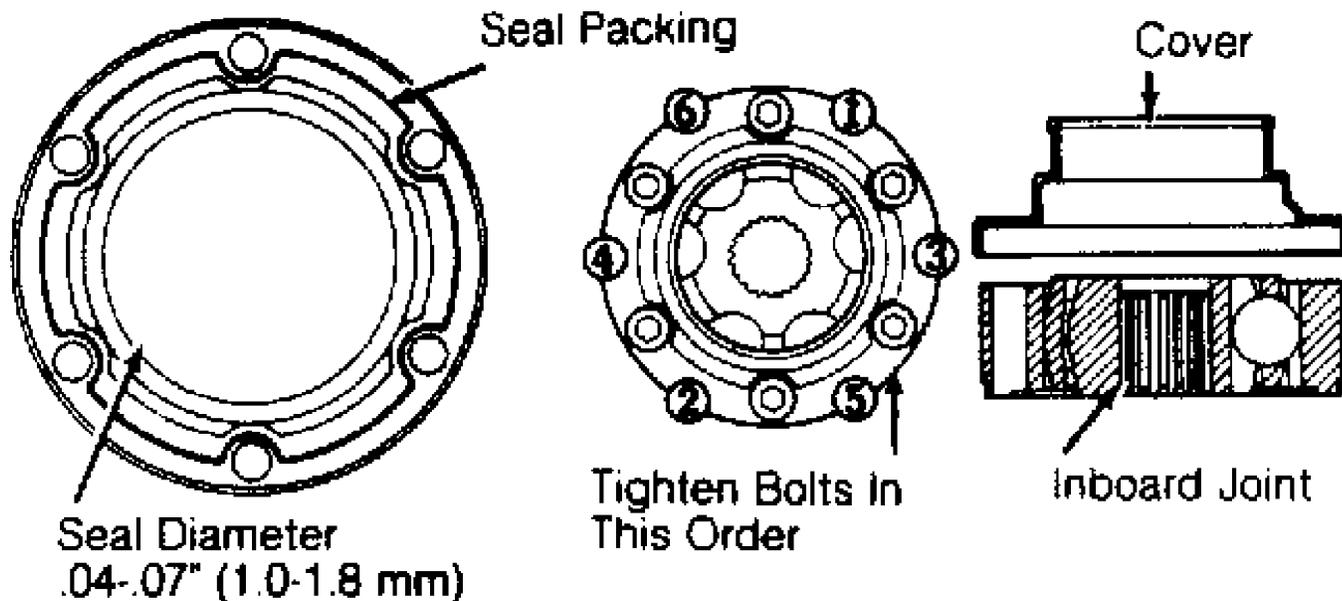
Tightening Inboard CV Joint Cover Bolts (Celica All-Trac)
